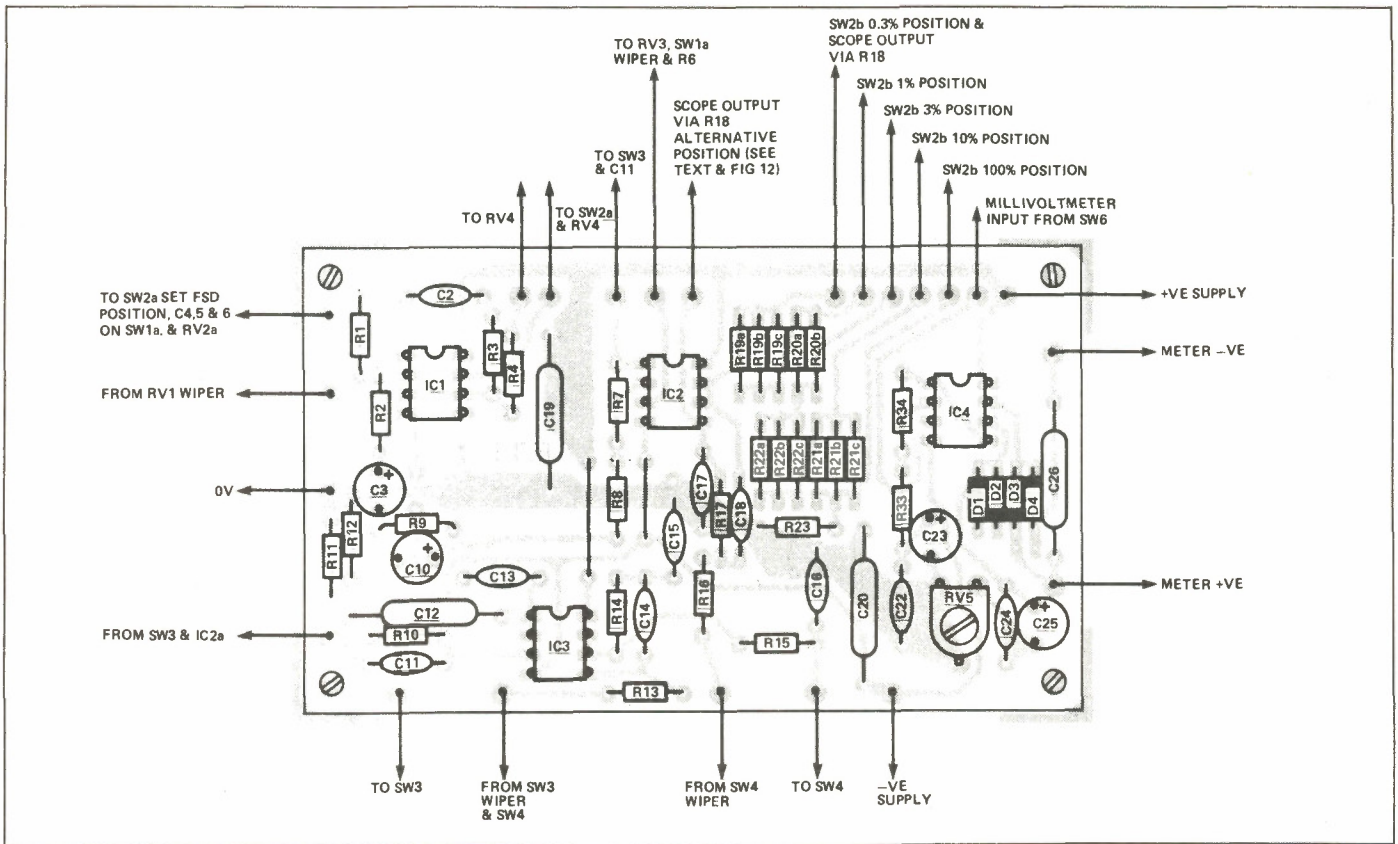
Component overlay of the THD and millivoltmeter PCB.
